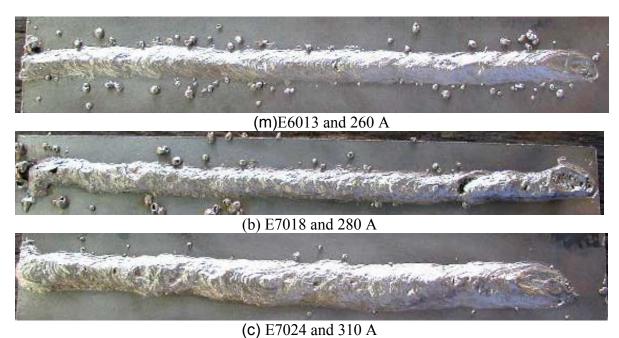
Pictures of the bead-on-plate wet welds deposited with the three electrode types with electrode positive on A572 Gr. 50 steel plates at 50 m.
